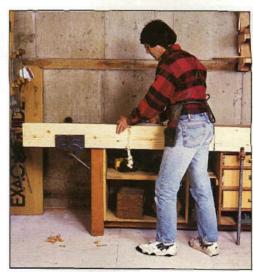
Photo E: To edge long workpieces, secure one end in a bench vise and prop the other end with a pipe clamp adjusted to correct height.
